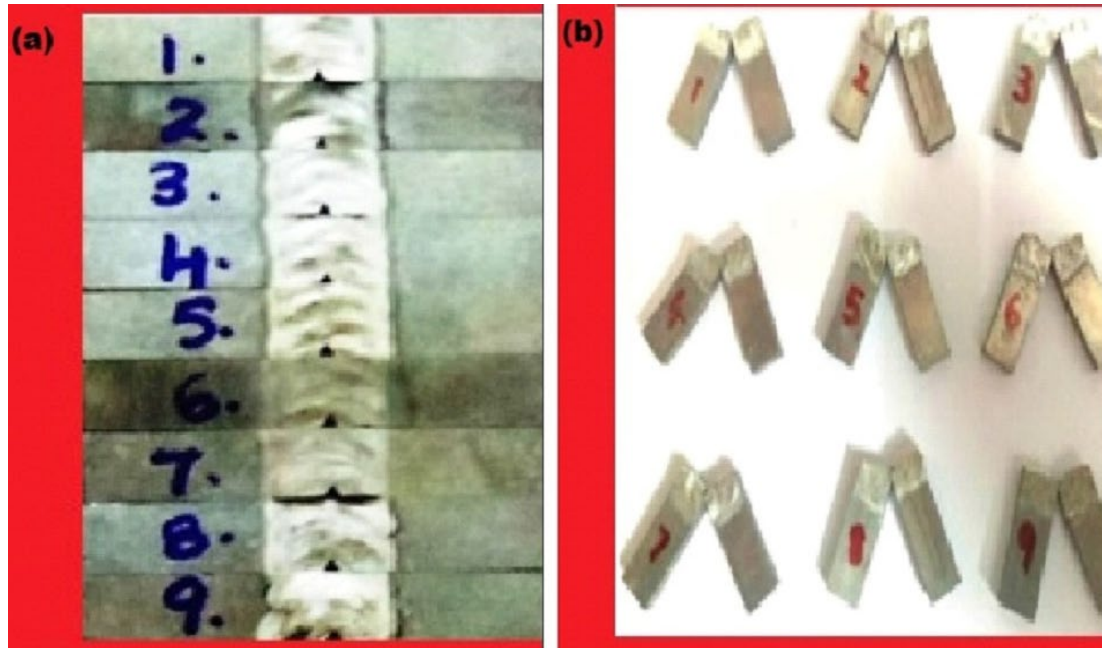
(a) Charpy impact test specimens before testing (b) Charpy impact test specimens after testing
